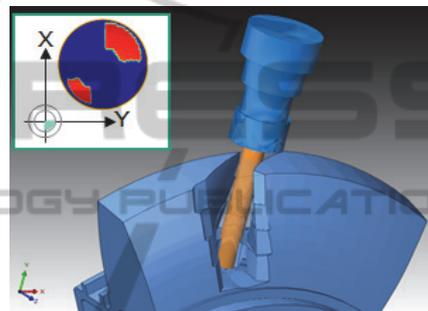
Example of a BLISK manufacturing with a critical engagement due to collision of the workpiece with the non-cutting part of the cutter.
